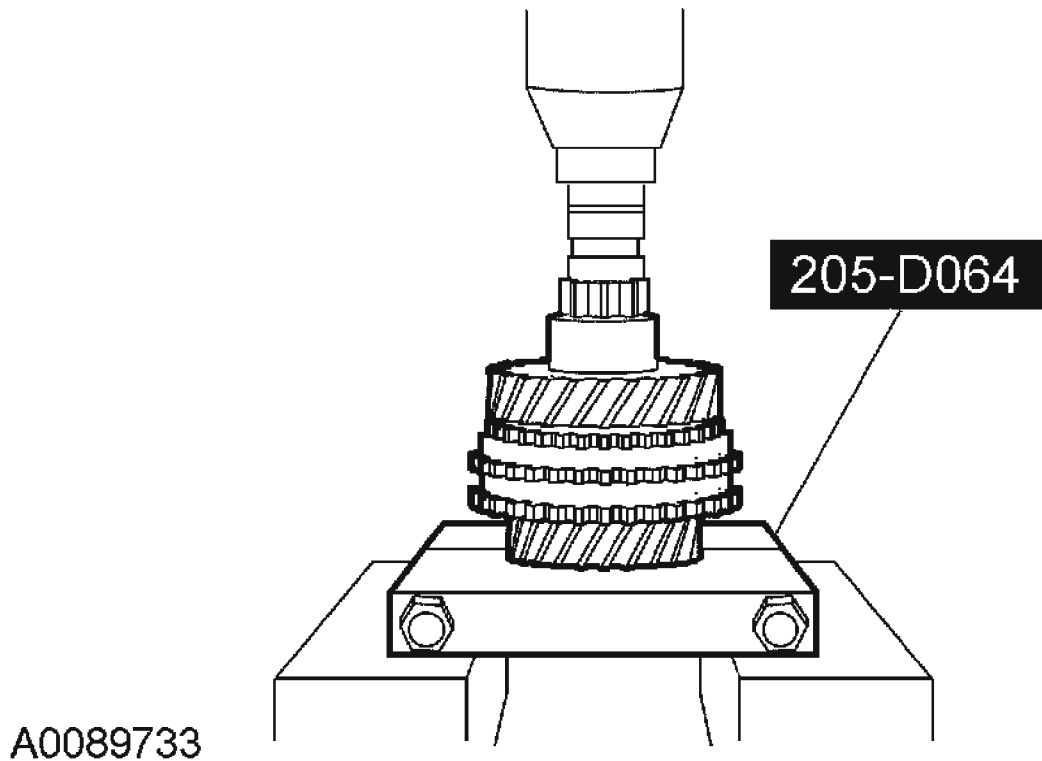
Removing Input Shaft Spacer And 5th Gear Stopper Together
